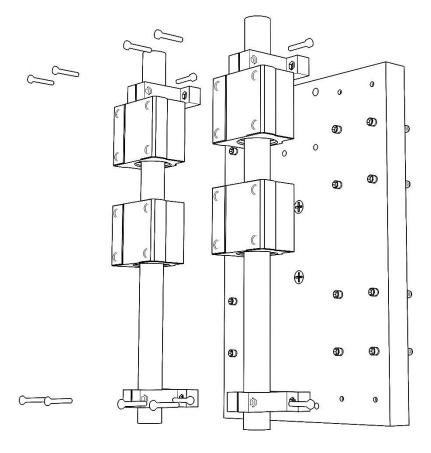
(PUTTING IN PLACE THE ASSEMBLY IN FIG. 16)
